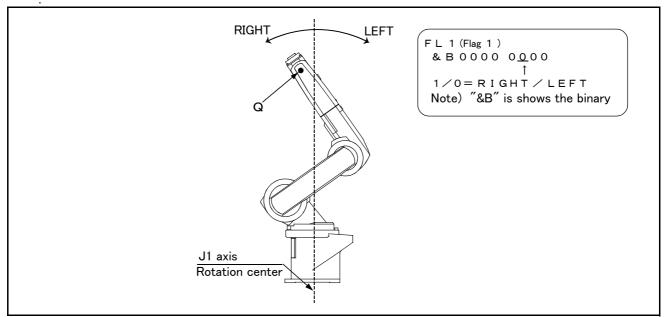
Configuration flag (RIGHT/LEFT)
